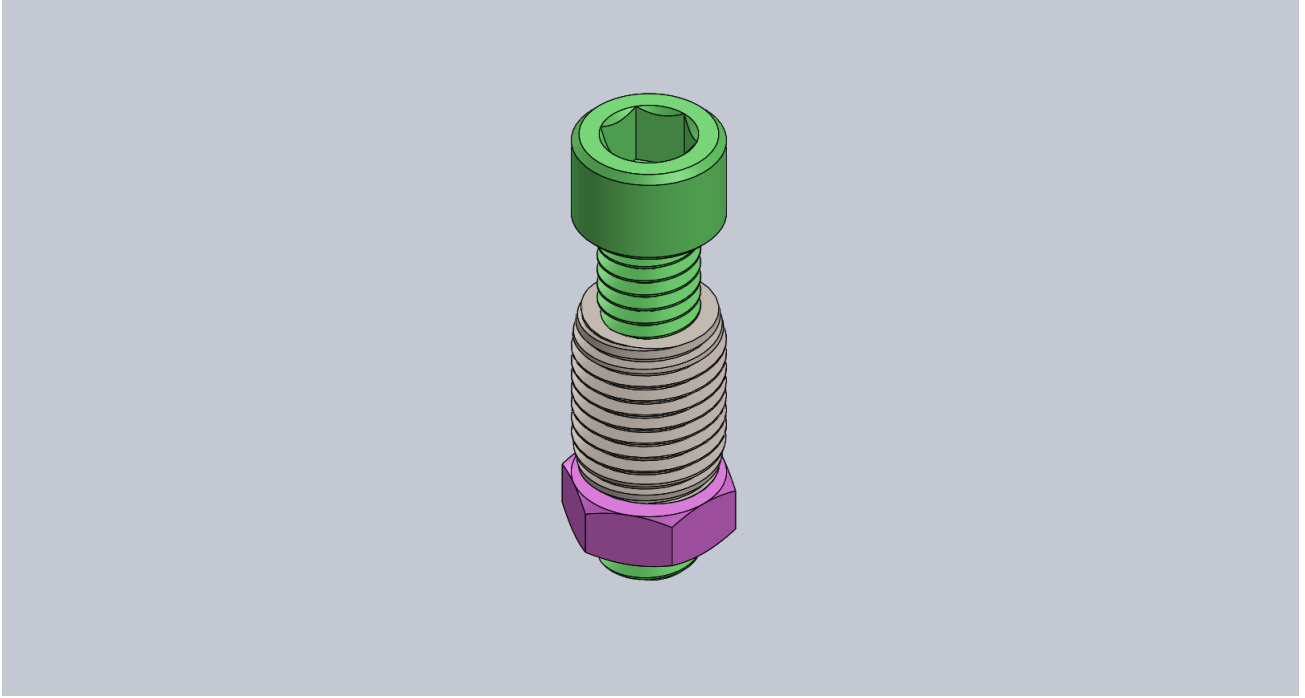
3D Model of Screw, Threaded Insert, and Nut
